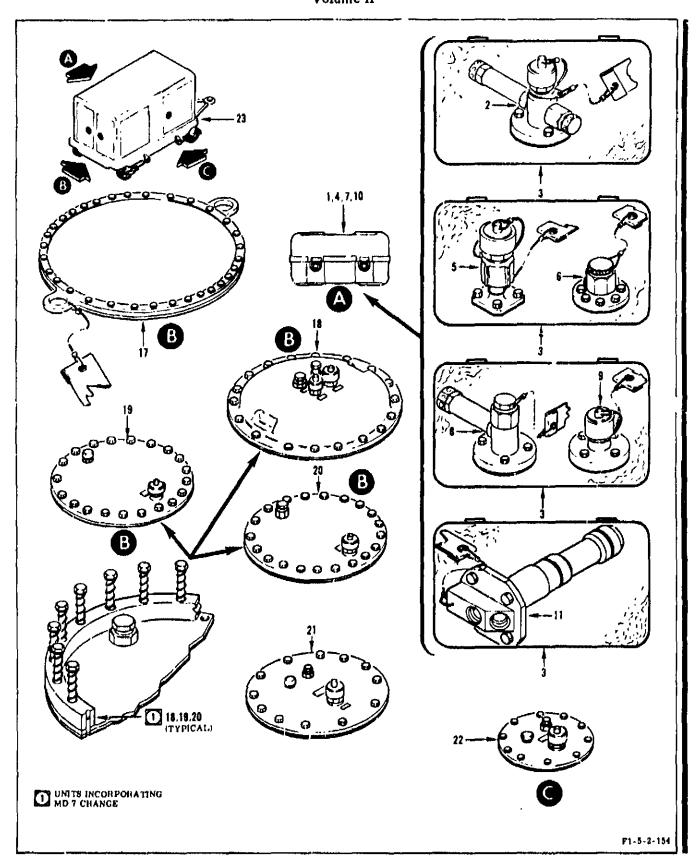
Test Plate, Plug, and Tool Set (Sheet 1 of 7)
